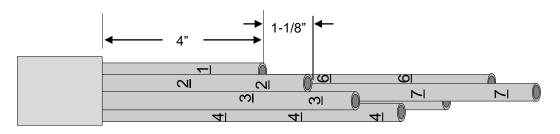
Cut First Tube Cable Tubes in <u>Ascending</u> Order; Tube 1-7 <u>or</u> Tube 1-19 Cut Second Tube Cable Tubes in <u>Descending</u> Order; Tube 7-1 <u>or</u> Tube 19-1
